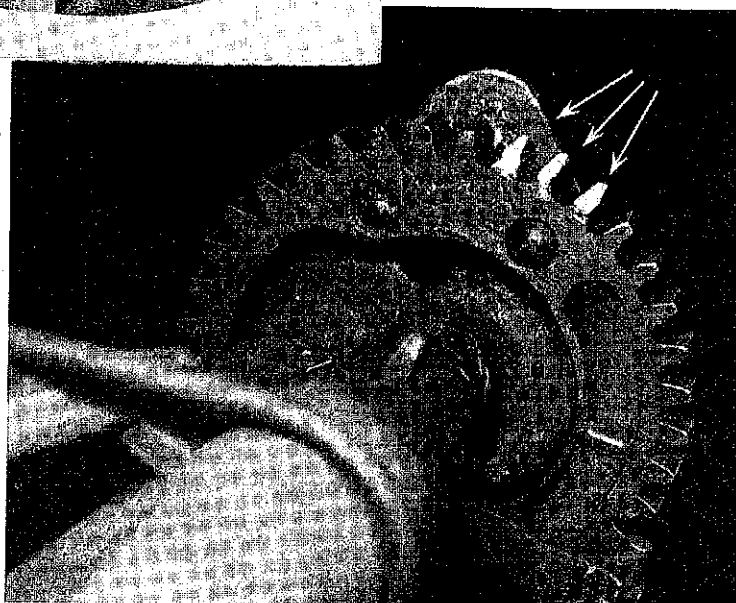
GEAR WHEEL COVER OF AMERICAN TYPE REAPER BINDER REPAIRED BY BRONZE-WELDING.
